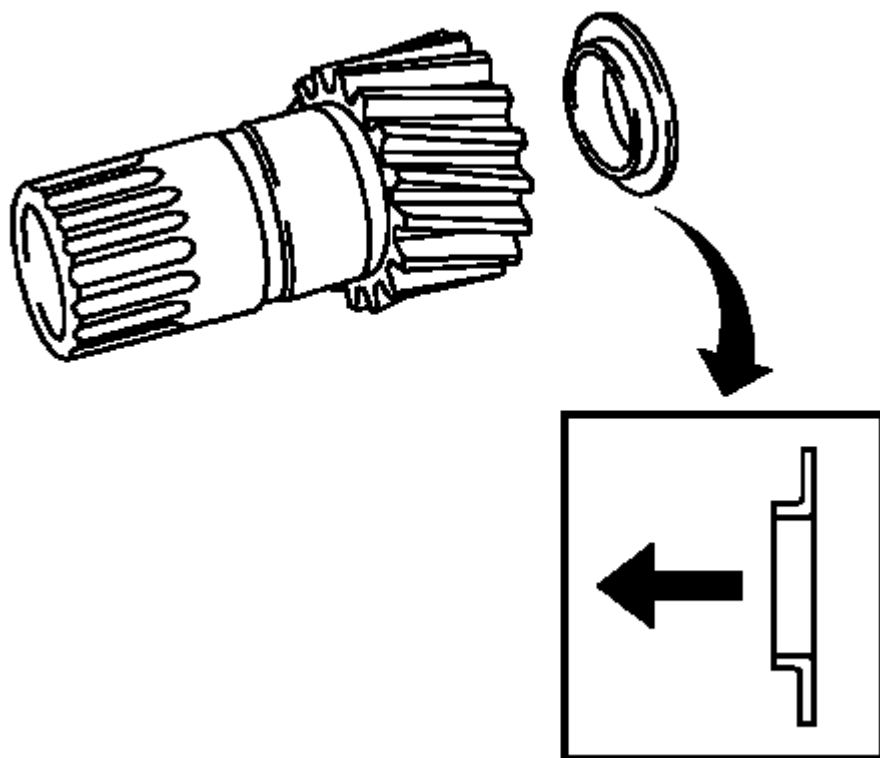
Thrust Bearing Race & Front Planetary Sun Gear
